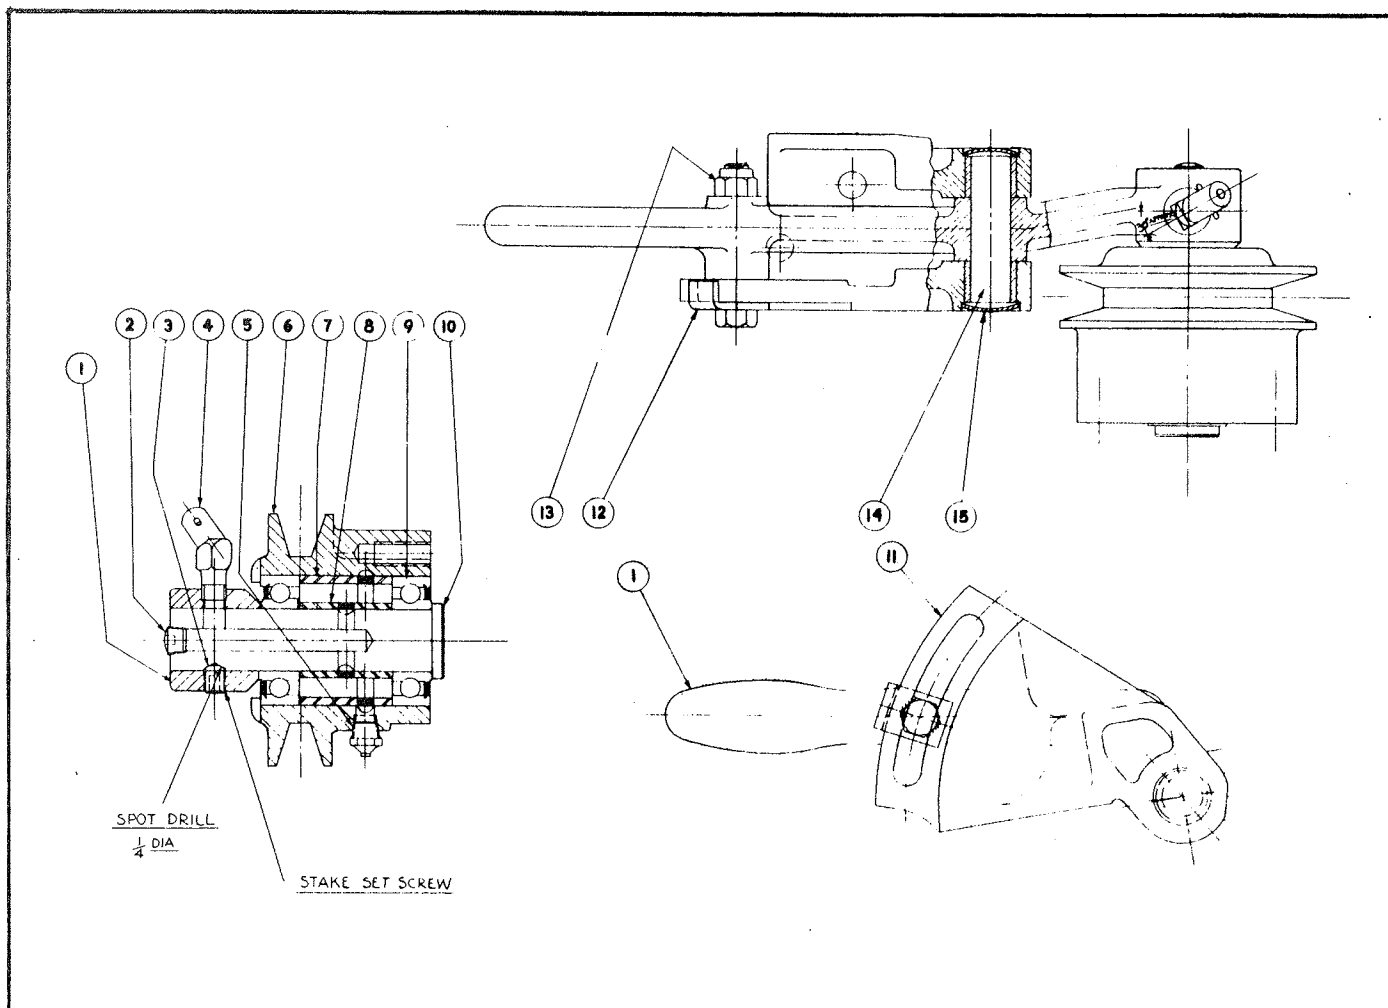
A—FAN SUPPORT ASSEMBLY PARTS FOR MODEL "B-1" AND "D-1" UNITS
